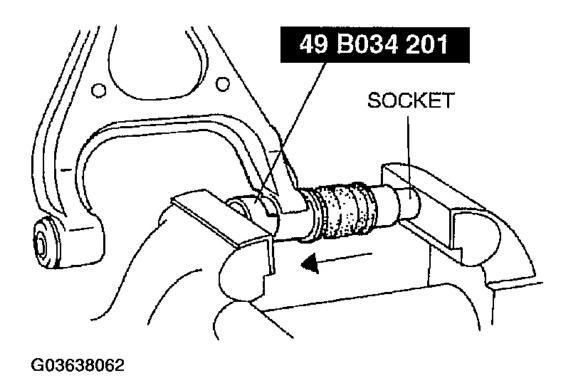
Installing Upper Arm Bushing Courtesy of MAZDA MOTORS CORP.
